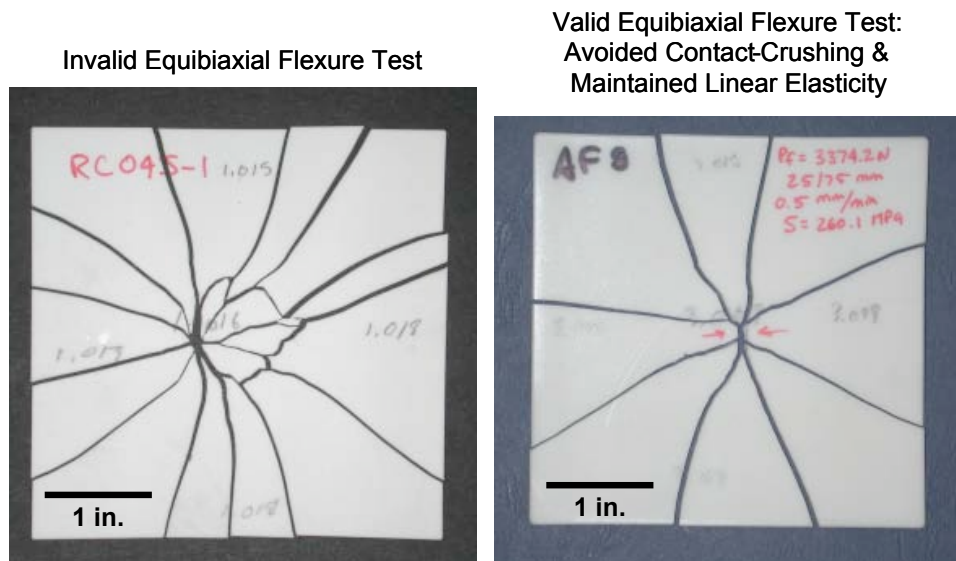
The picture on the left shows an invalid test; the upper ring had “punched” a disk of fragments through the too-thin specimen (i.e., the fixture had caused the fracture event). The picture on the right shows a valid test (i.e., the fixture did not cause the fracture event) and two arrows point to the mating fracture surface where the fracture event was initiated.
